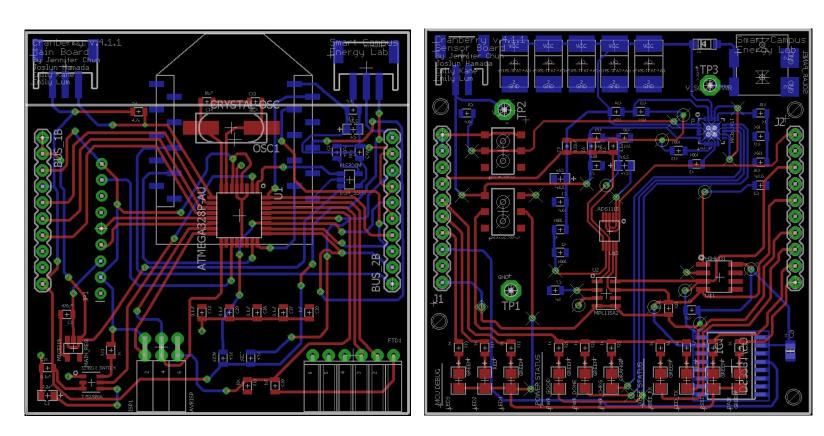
Cranberry v4.1 PCB (2.375" by 2.375")
